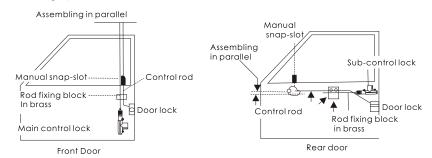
ASSEMBLING INSTALLATION ILLUSTRATION OF CONTROL LOCKS
